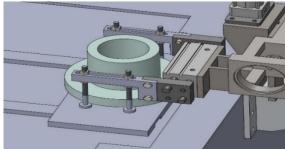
Parts to be machined Fig.2-4. Schematic diagram of gripping blank 3.SIMULATION ANALYSIS OF THE MANIPULATOR
